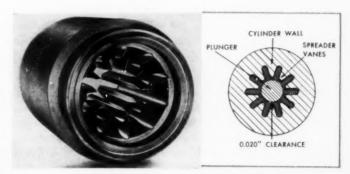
, left—Injection cylinder showing machined slots through which material is forced to front end of cylinder. Fig. 3, right—Spreader vanes are formed by machined slots
